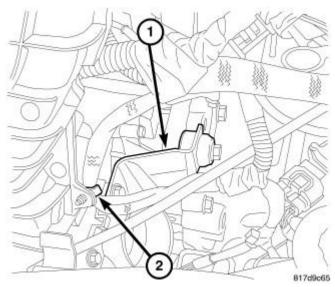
Throttle Body Support Bracket & Wiring Harness Courtesy of CHRYSLER GROUP, LLC
